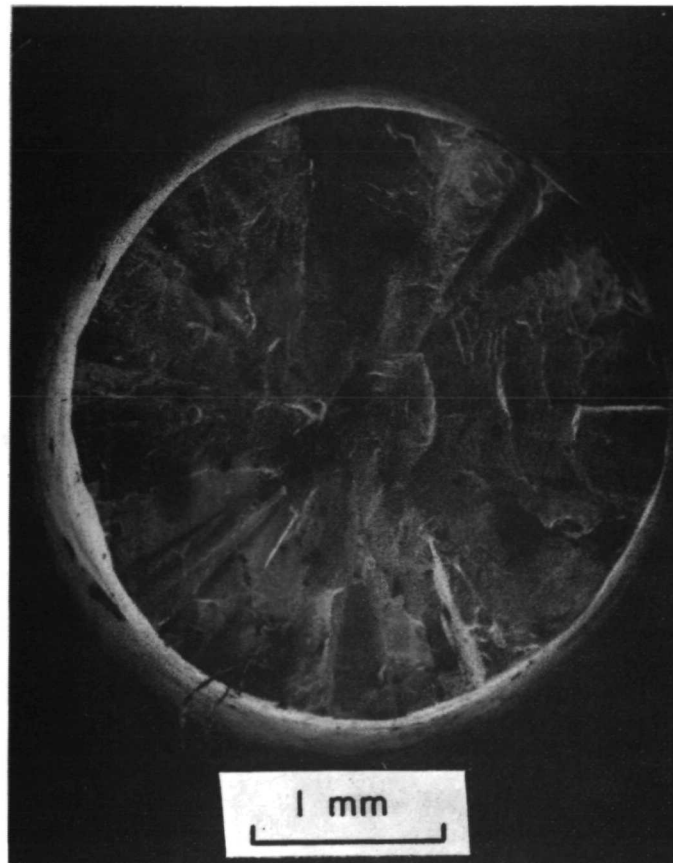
(c). The fracture surface of polycrystalline Specimen 63 showing brittle fracture and radial grain structure.
